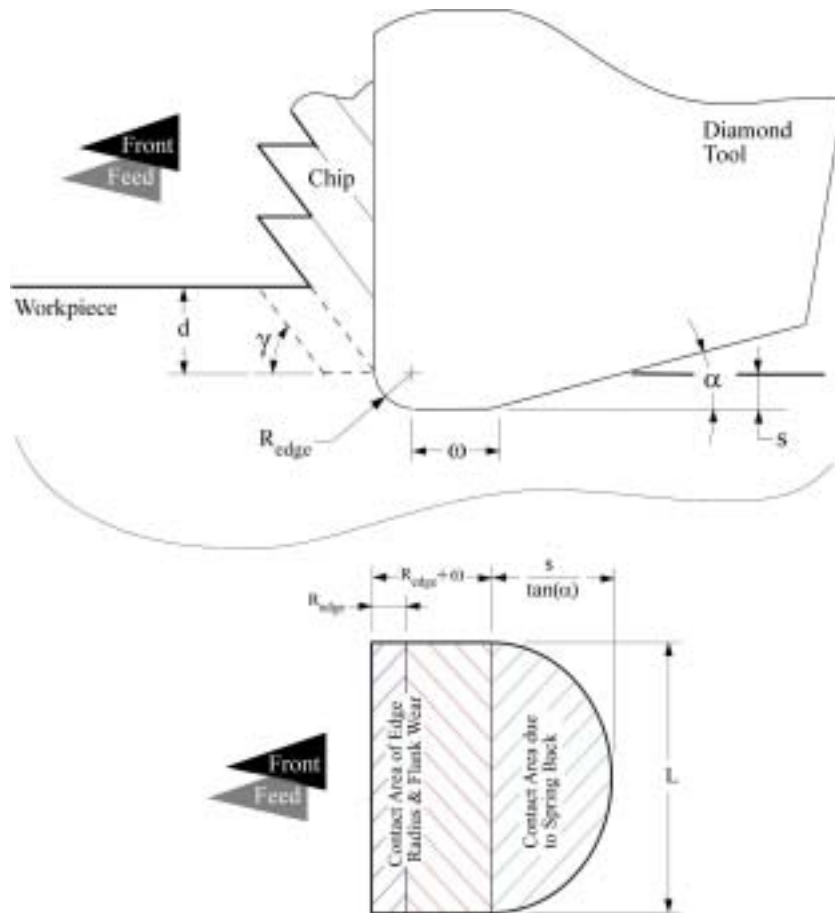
Standard Cutting Model Tool/Workpiece Interface
